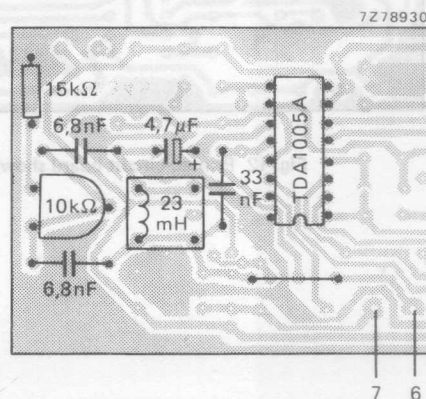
Printed-circuit board component side, showing component layout of Fig. 17.
